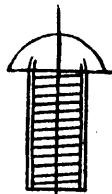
THE BOTTOM LINES OF THE THREAD IN PLACE.
